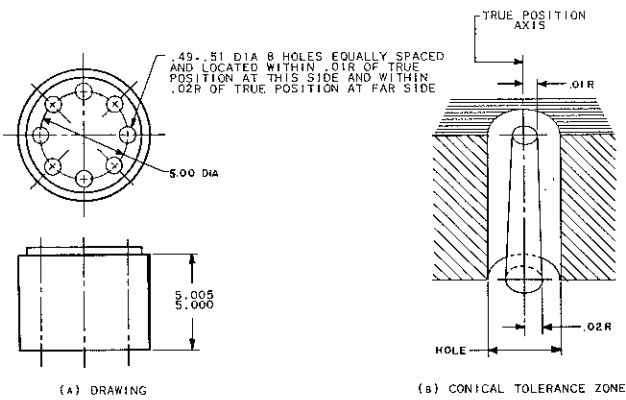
In this case it is impracticable to maintain both ends of the long hole to a close true position tolerance. The far end has a larger positional tolerance than the near end.
